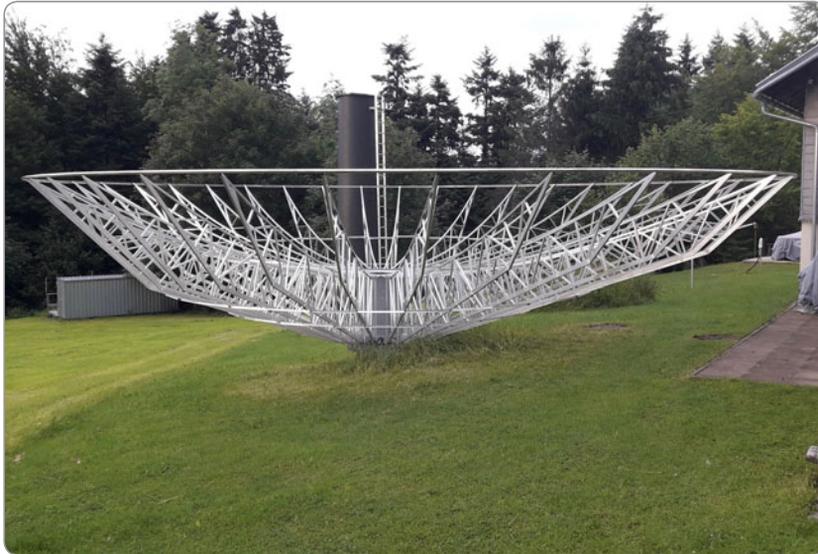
Erich OE9ERC's new 12 metre Dish under construction.
